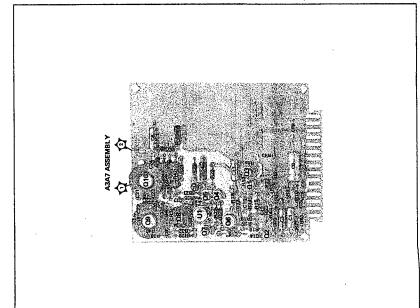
ASA7 VTG/HF Coil Oriver Assembly Component and Test Point Loradons
